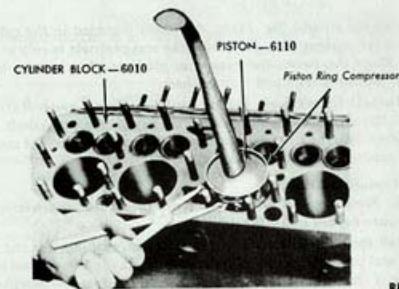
Installing Piston and Connecting Rod Assemblies in Cylinder Bore
